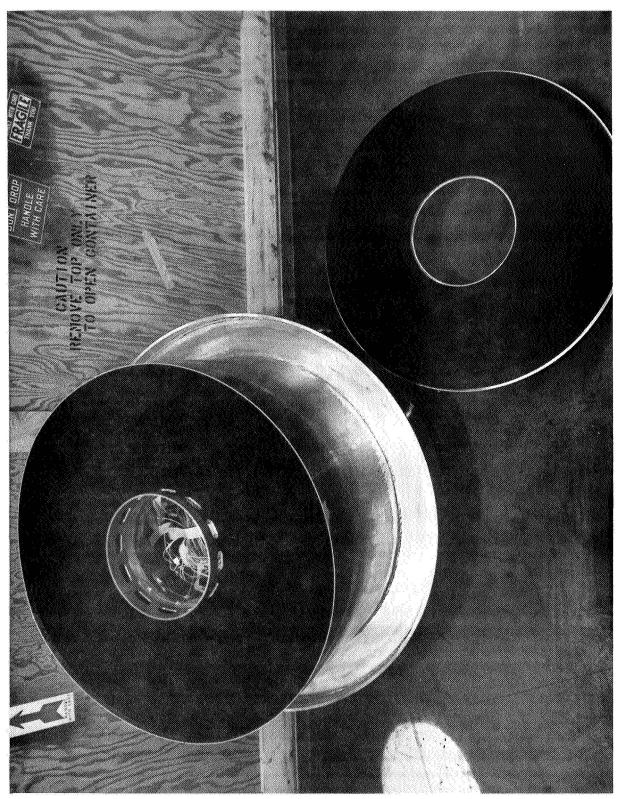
FULL SCALE MODEL BEFORE FINAL WELDING
